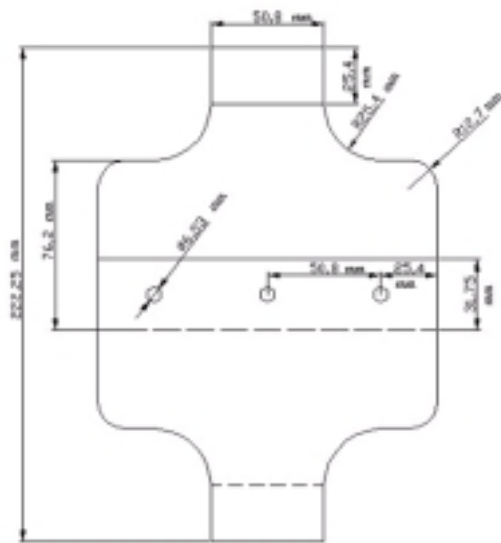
Dimension of specimens, riveted-pitch distance as 50.8 mm
